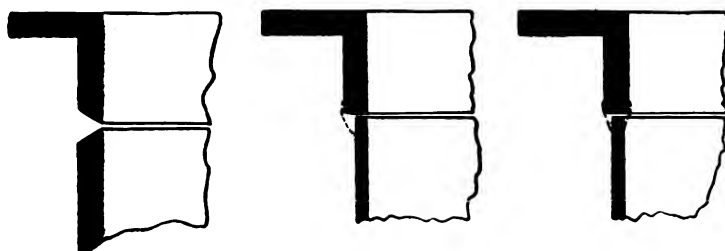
Welds for Tank Reinforcing Rings
